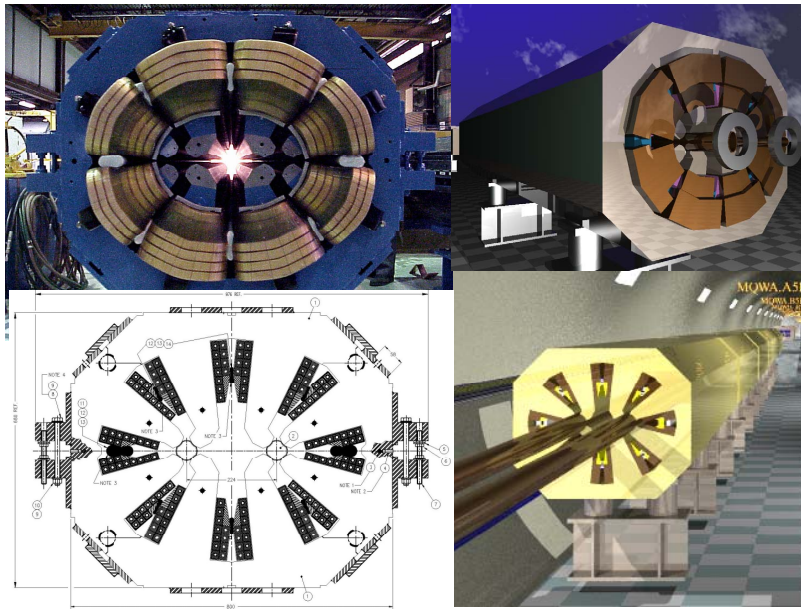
Real view, technical drawing (left) and FLUKA model (right) of a MQW warm magnet.
